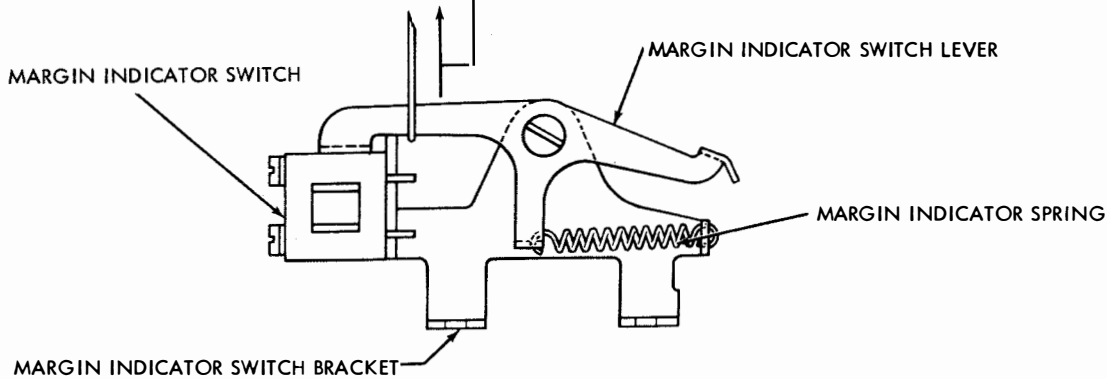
KEYBOARD, TRANSFER LEVER AND MARGIN INDICATOR MECHANISMS
